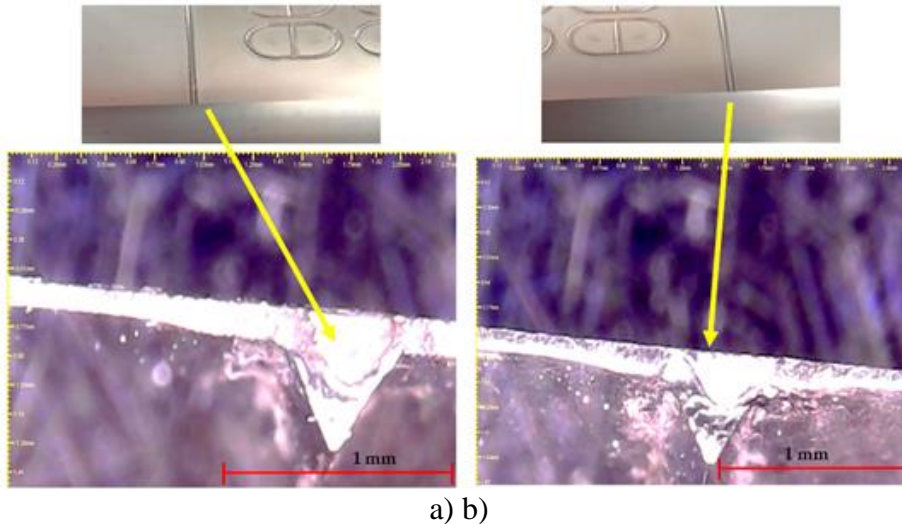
M6 die-cut: a) left side knife wear; b) right side knife wear.
